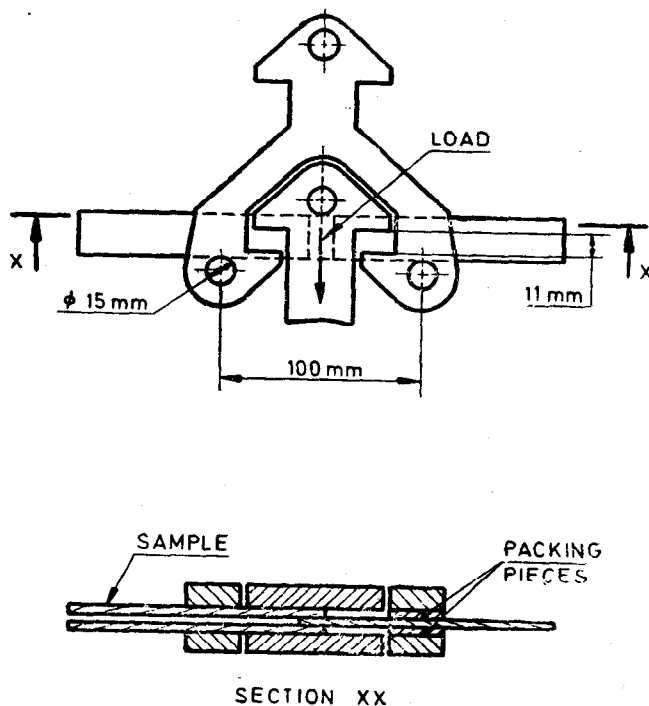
JIG FOR LOADING A TEST SPECIMEN FOR STUDYING THE SUSTAINED LOAD BEHAVIOUR OF PVAC ADHESIVE JOINTS
